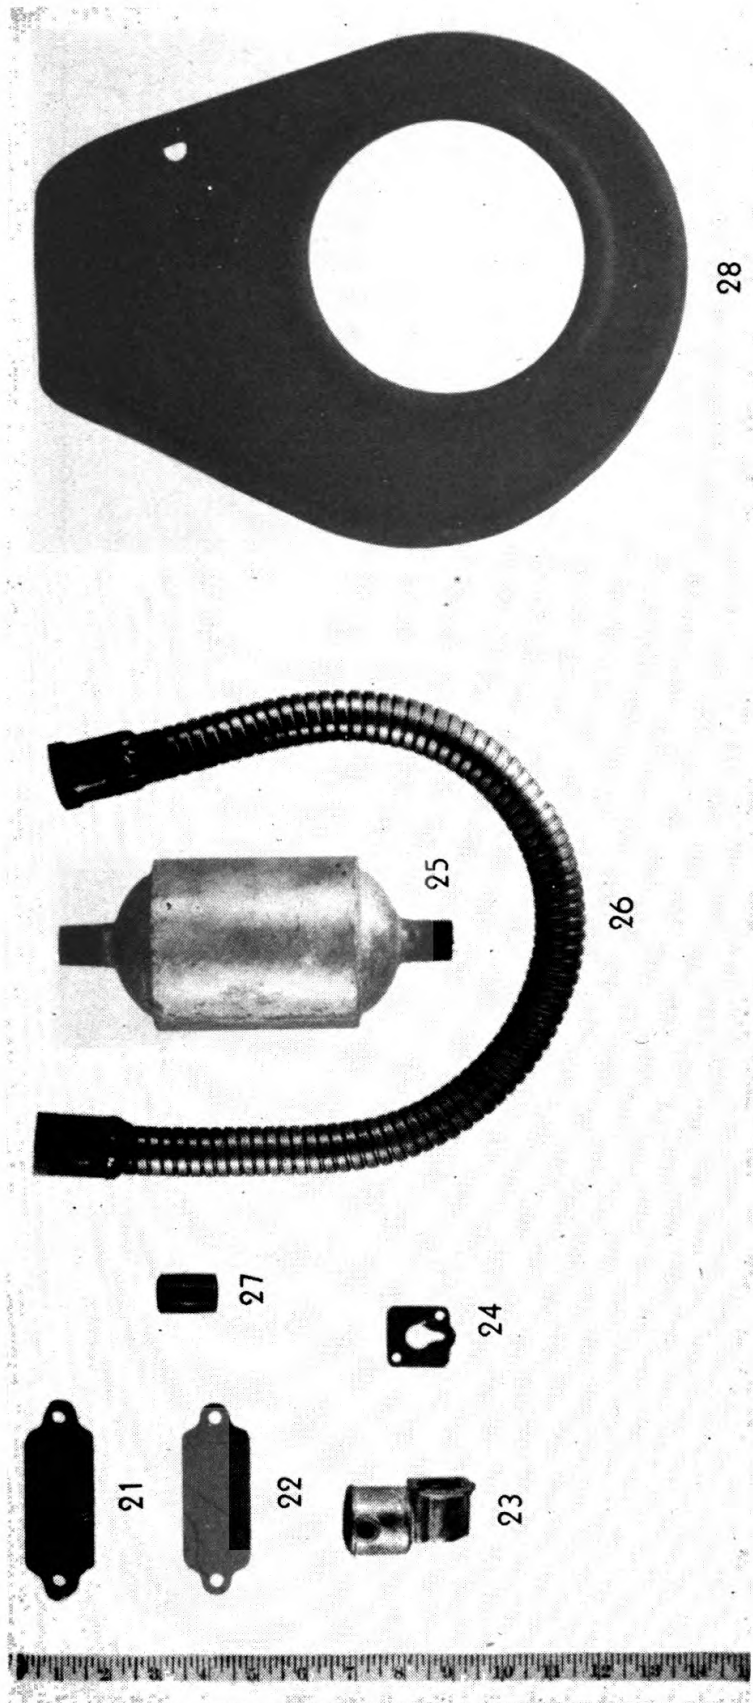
Valve Spring Cover, Breather, Muffler and Blower Housing Group
